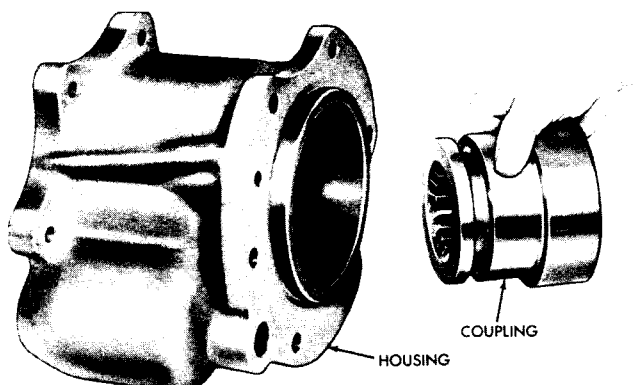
Removing (or installing) shifter coupling^{S2772}
